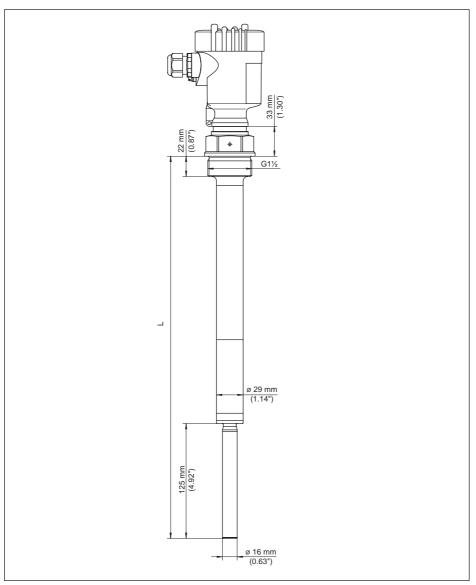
VEGAVIB 63, threaded version G1½ (DIN ISO 228/1)
